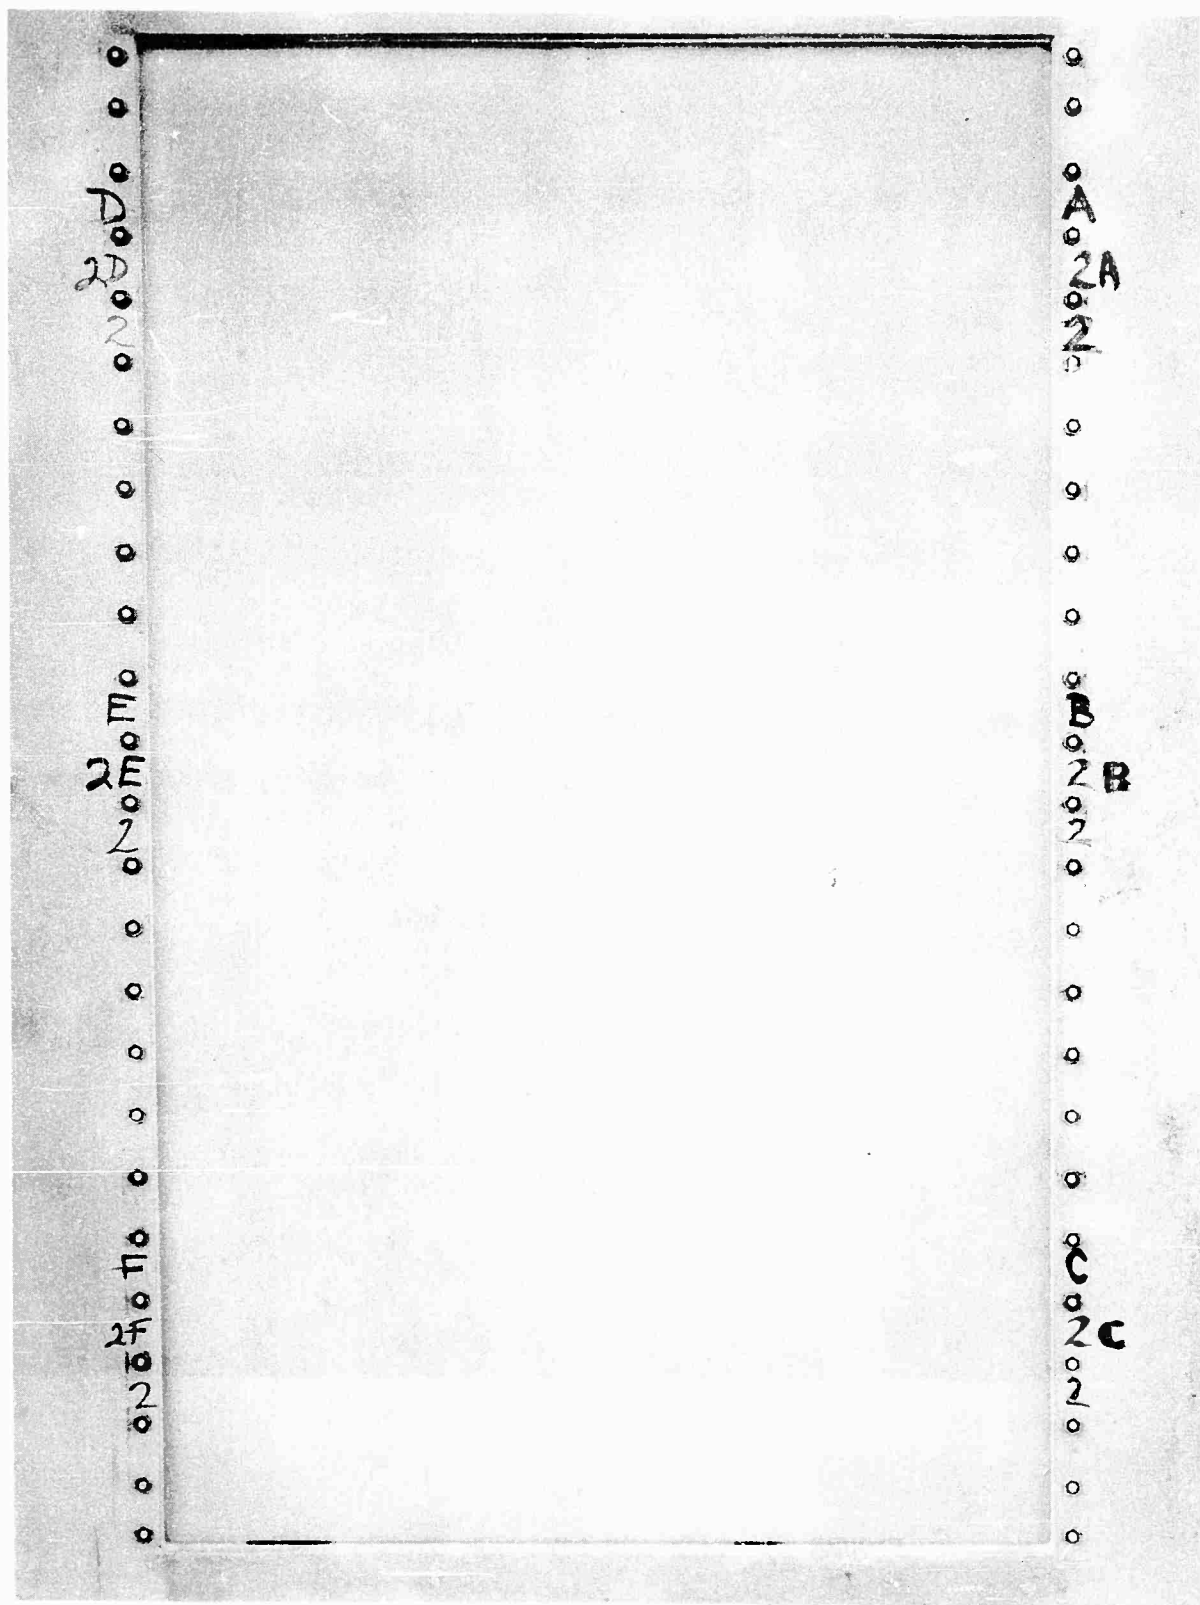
SKIN AND STRINGER STRESS COAT OVERALL VIEW
